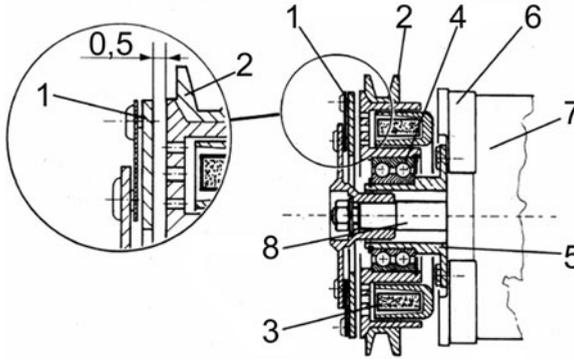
Friction clutch with electromagnetic actuator. Components: 1 drag plate group, 2 pulley, 3 spool, 4 bearing, 5 pulley rest hub, 6 compressor head, 7 compressor body, 8 compressor shaft.
